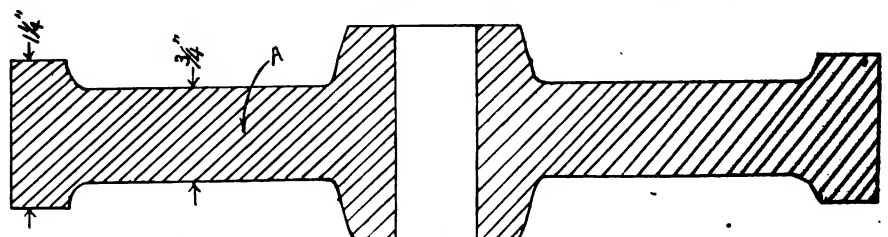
SECTIONAL VIEW OF TRANSMISSION GEAR CORRECTLY DESIGNED TO PREVENT WARPING IN HARDENING
